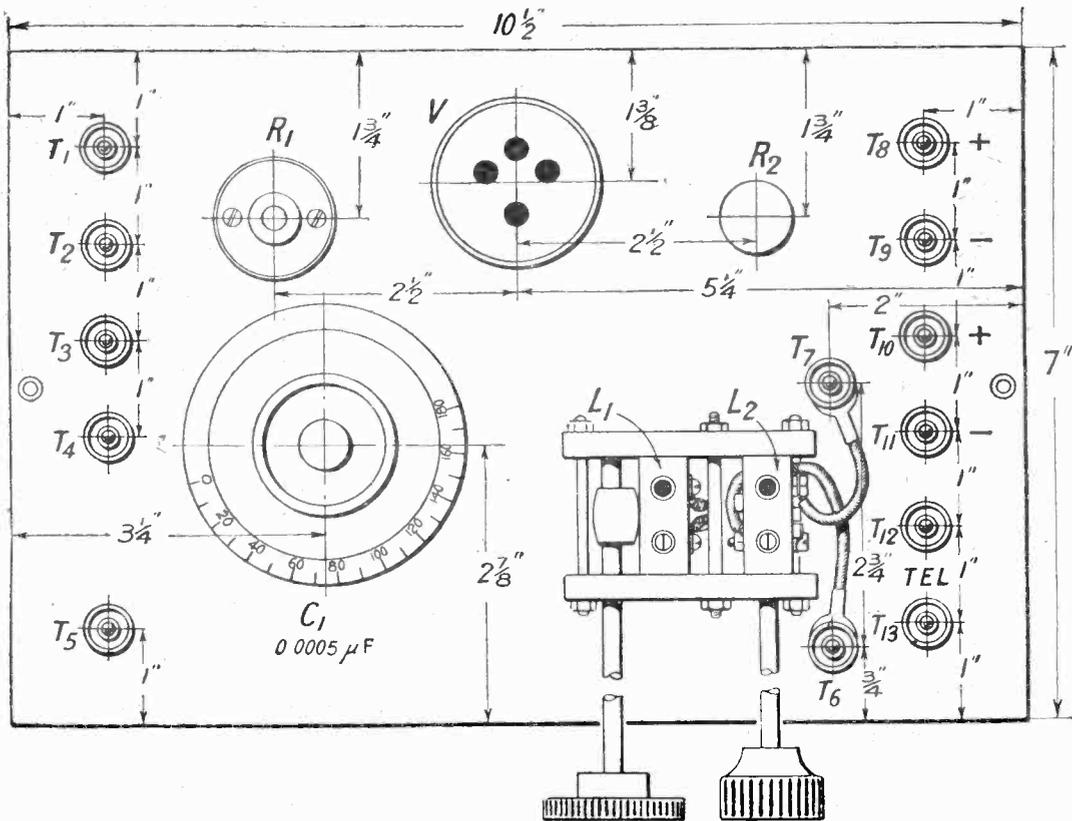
A scale drawing of the top of the panel, showing the layout of the parts, and all necessary dimensions for drilling the holes.
